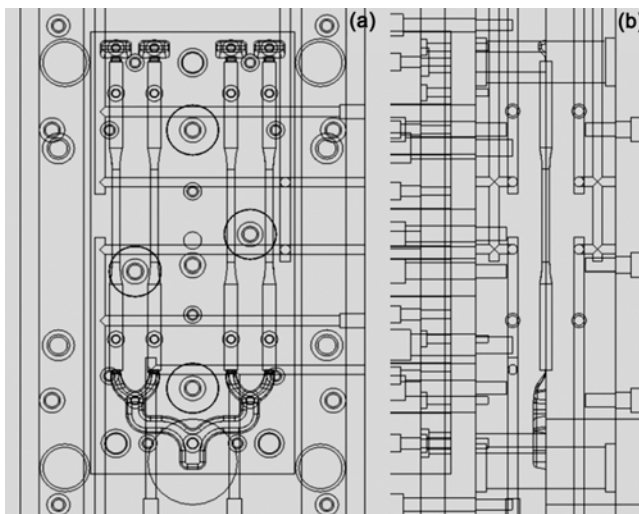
Technical drawing of the die casting mold (a) front view and (b) side view
